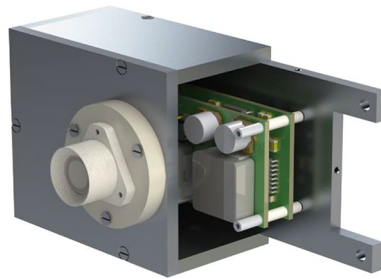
VAT with aluminum chassis for the power processing unit as sectional view
